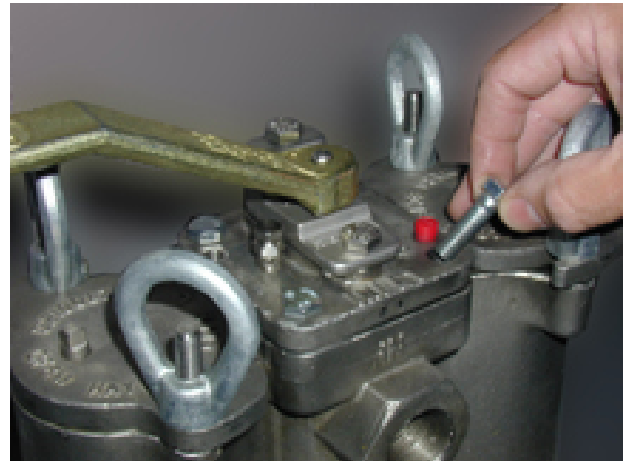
The cartridge insertion / extraction tool is removed and the red thread protector and hex head screws are reinstalled.
